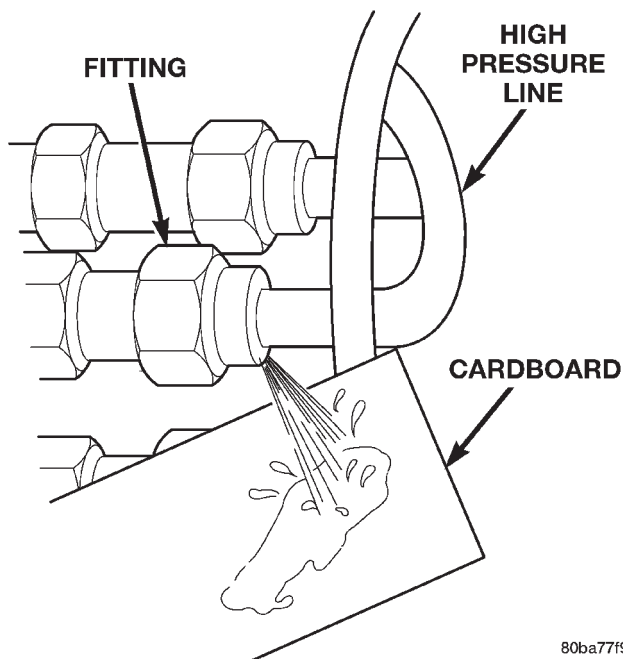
Typical Fuel Pressure Test at Injection Pump
